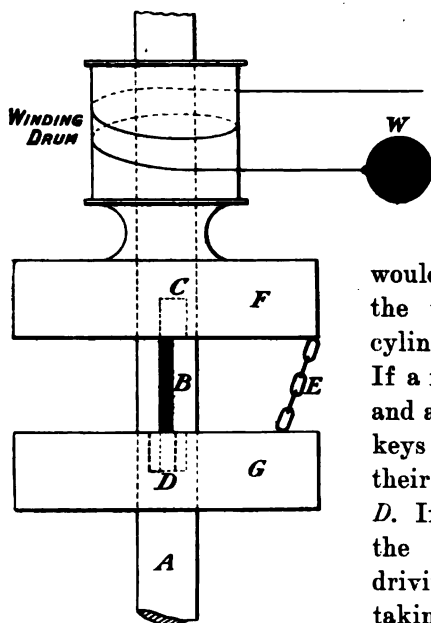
AUTOMATIC THROW-OUT GEAR.
